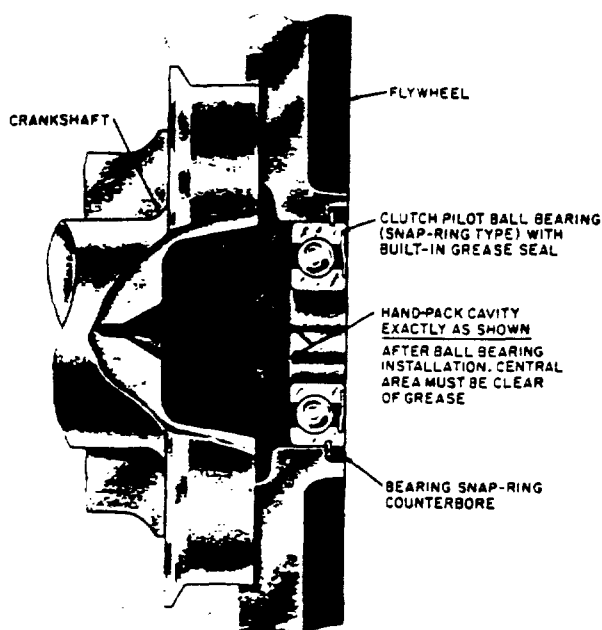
Cut-away View of Clutch Pilot Bearing Grease Reservoir Correctly Packed
